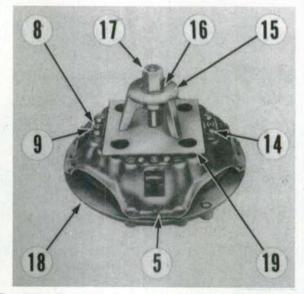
Clutch fixture tool (Nuday No. 2142) should be used when servicing clutch assembly. 5.
